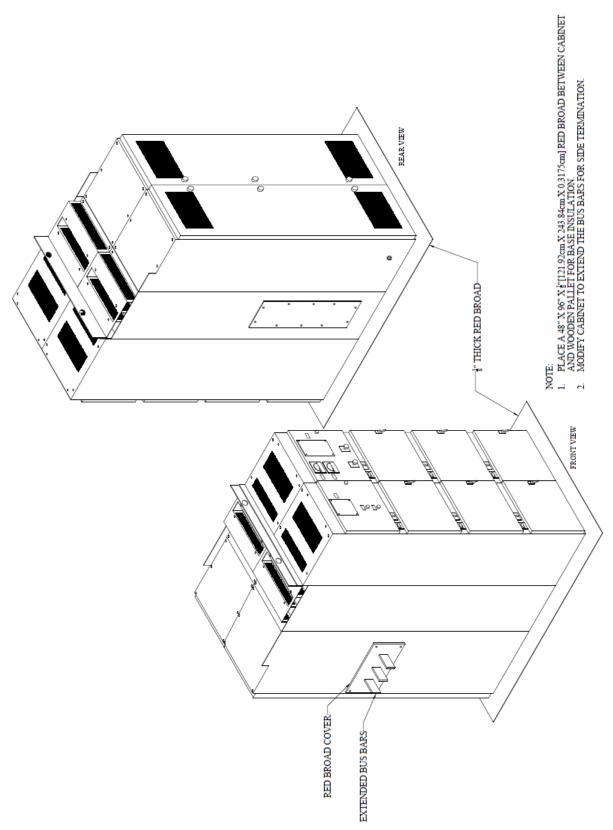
Isometric drawings of LV metal enclosed indoor switchgear.
